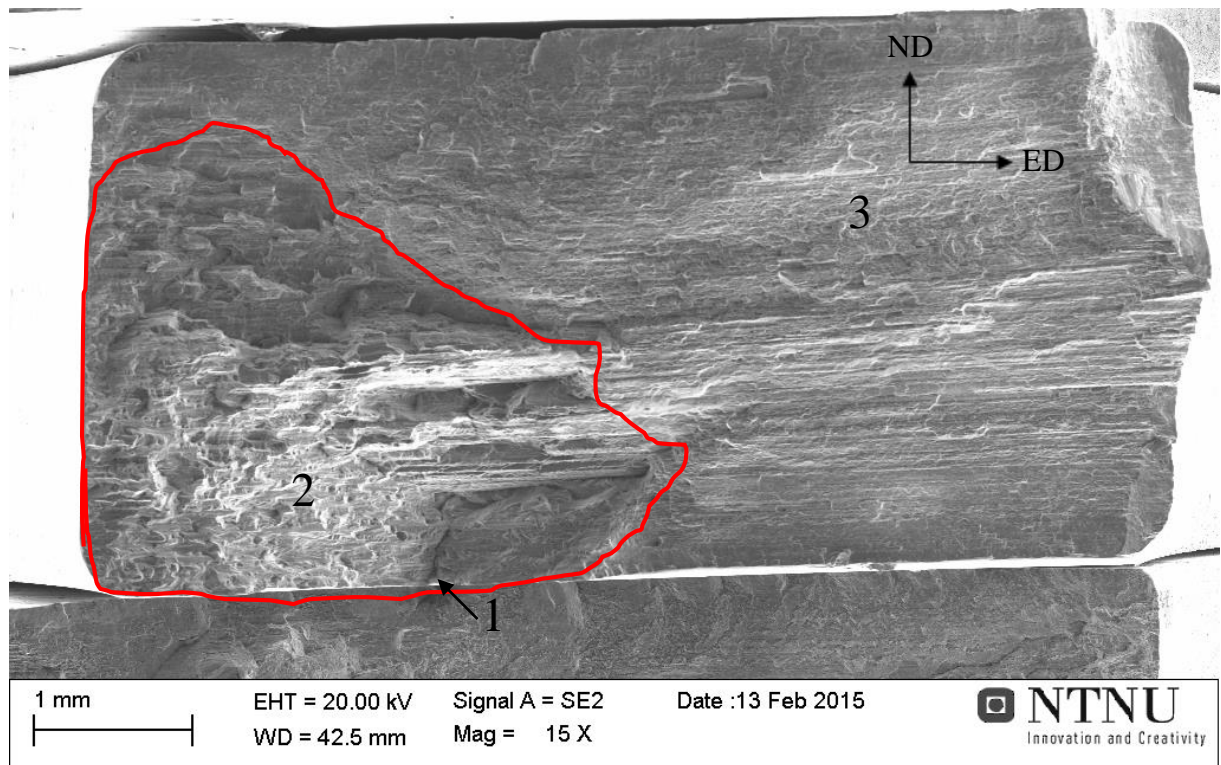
An overview of the fractured surface of AA7108 T1 with the longest fatigue life, 15X magnification. The fatigue fractured area is enclosed by the red line.
